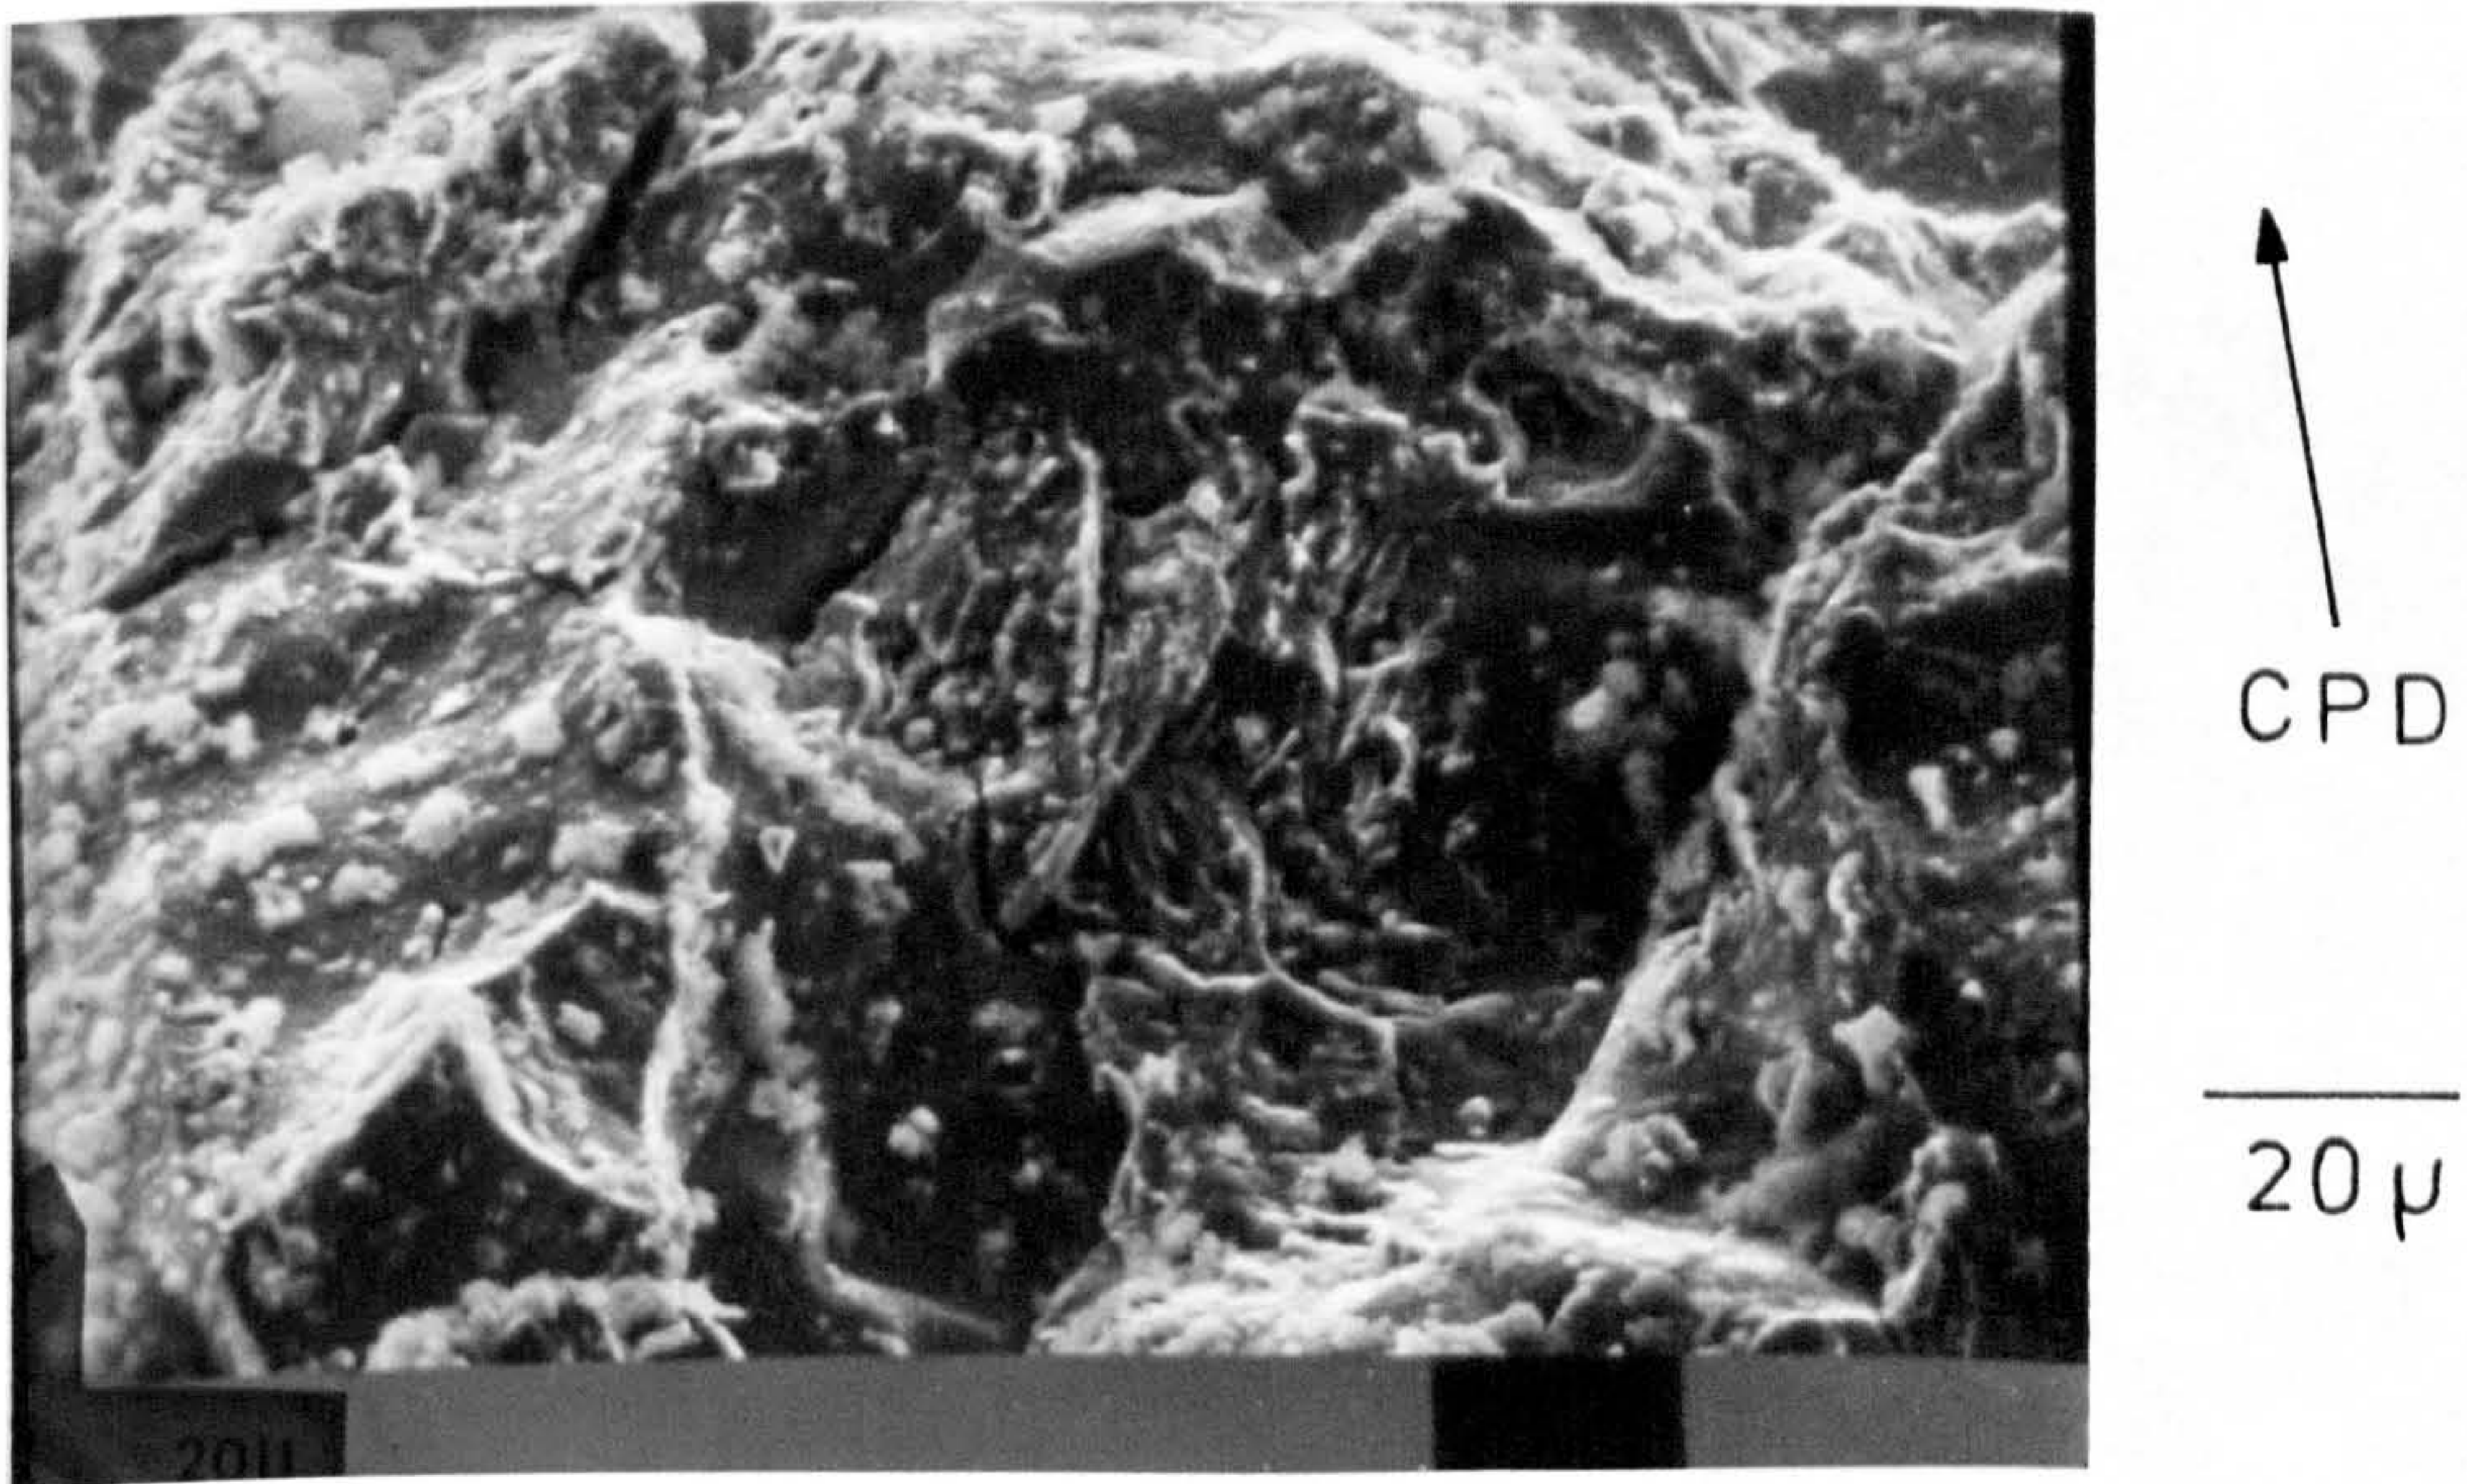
Towards the edge of fracture surface shown in figure 132
